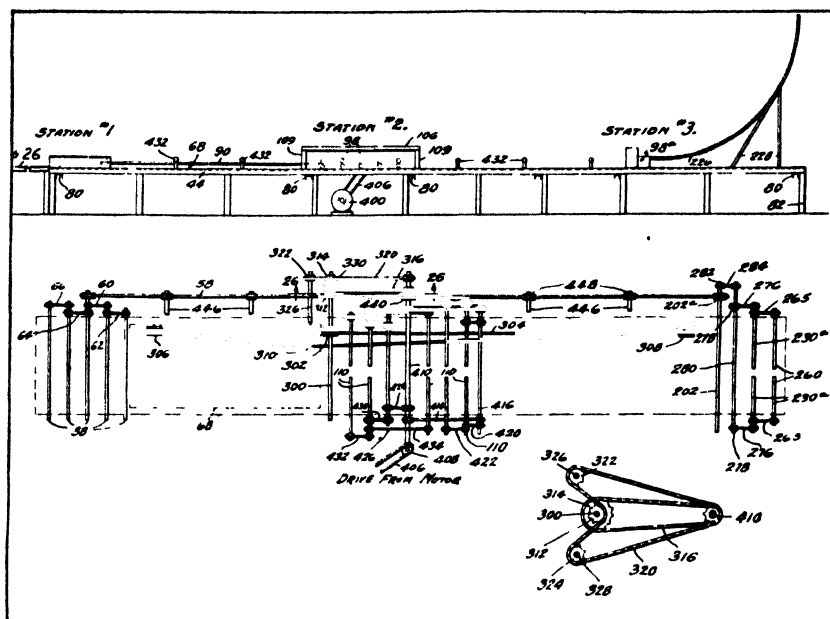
The curving rolls, (top), and the drive hook-up, drive shafts, sprockets, drive chains, etc., (center and bottom).
